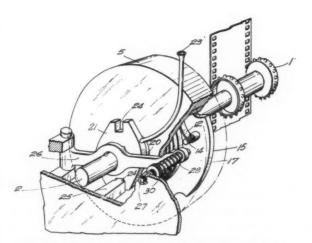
Rotary motion is transmitted from gear to flywheel through spiral spring
